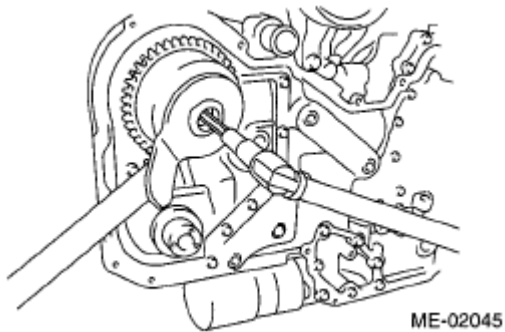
Identifying ST 499977500 Cam Sprocket Wrench
